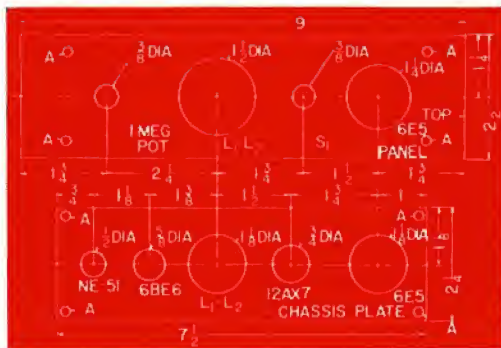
PANEL AND CHASSIS PARTS LAYOUT used for this model. Small holes for socket and terminal strip hardware are not shown and should be located from those parts.
